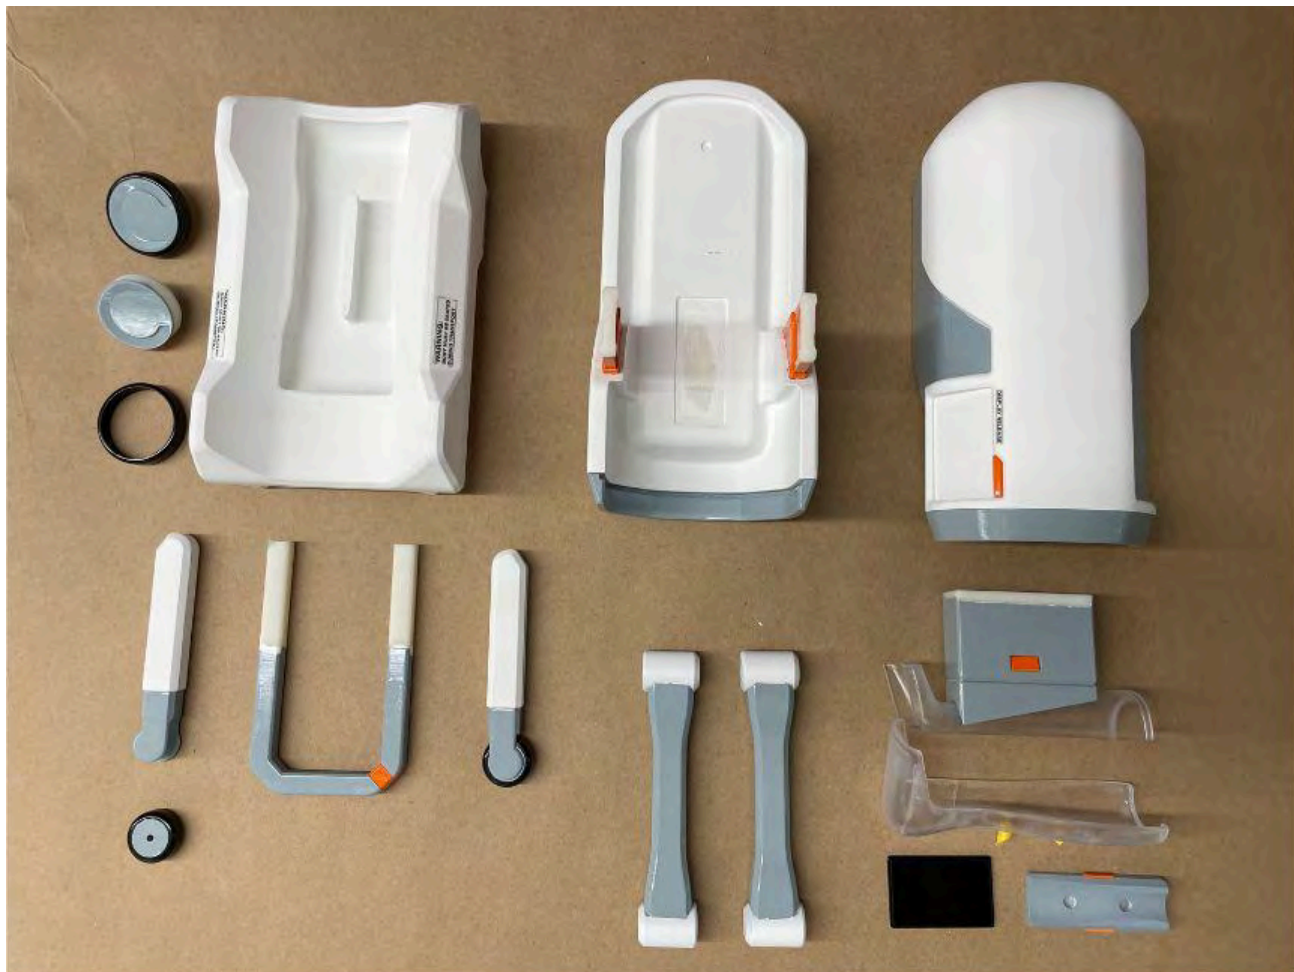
Physical Model Fabrication: Parts Ready for Assembly, Decals Applied
